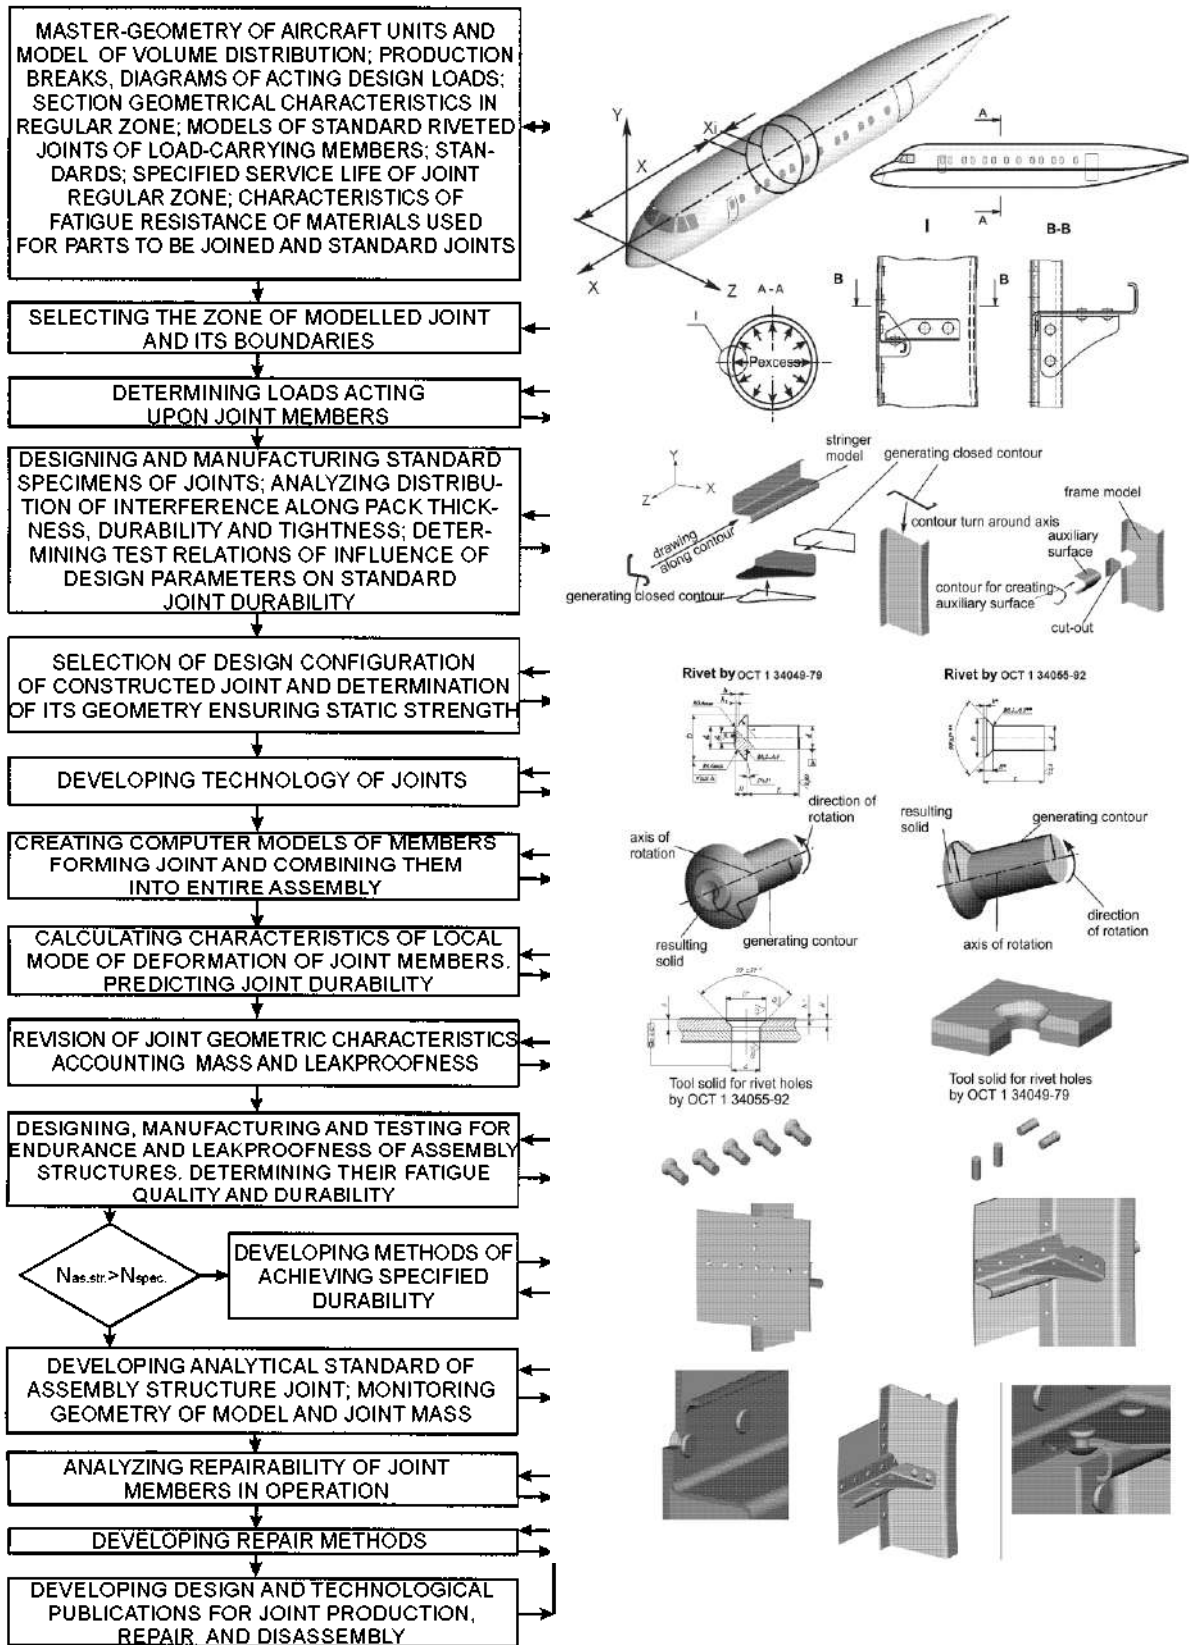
Method of integrated design and modeling standard riveted joints of aircraft assembly structures
